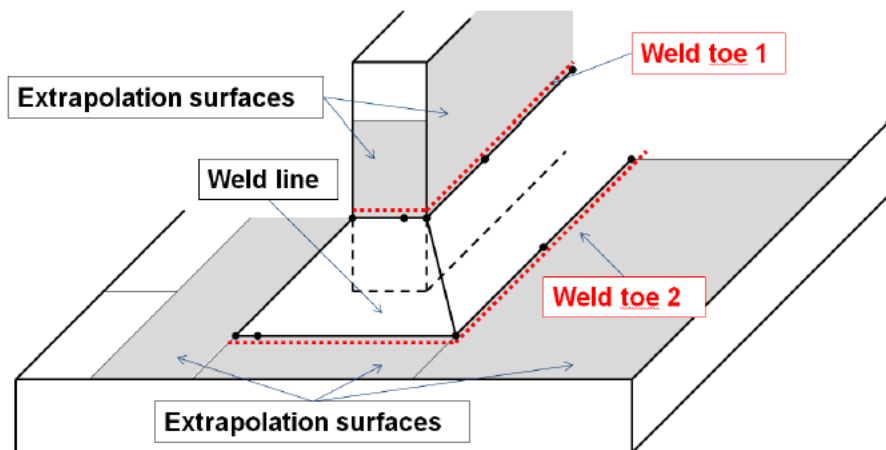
Weld toes and extrapolation surfaces
